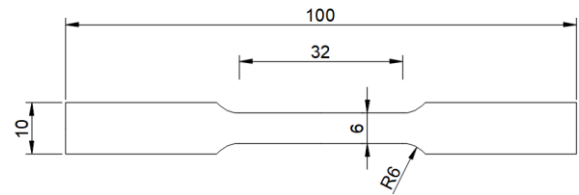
Drawing of tensile test specimen of mandrel (Unit : mm)
